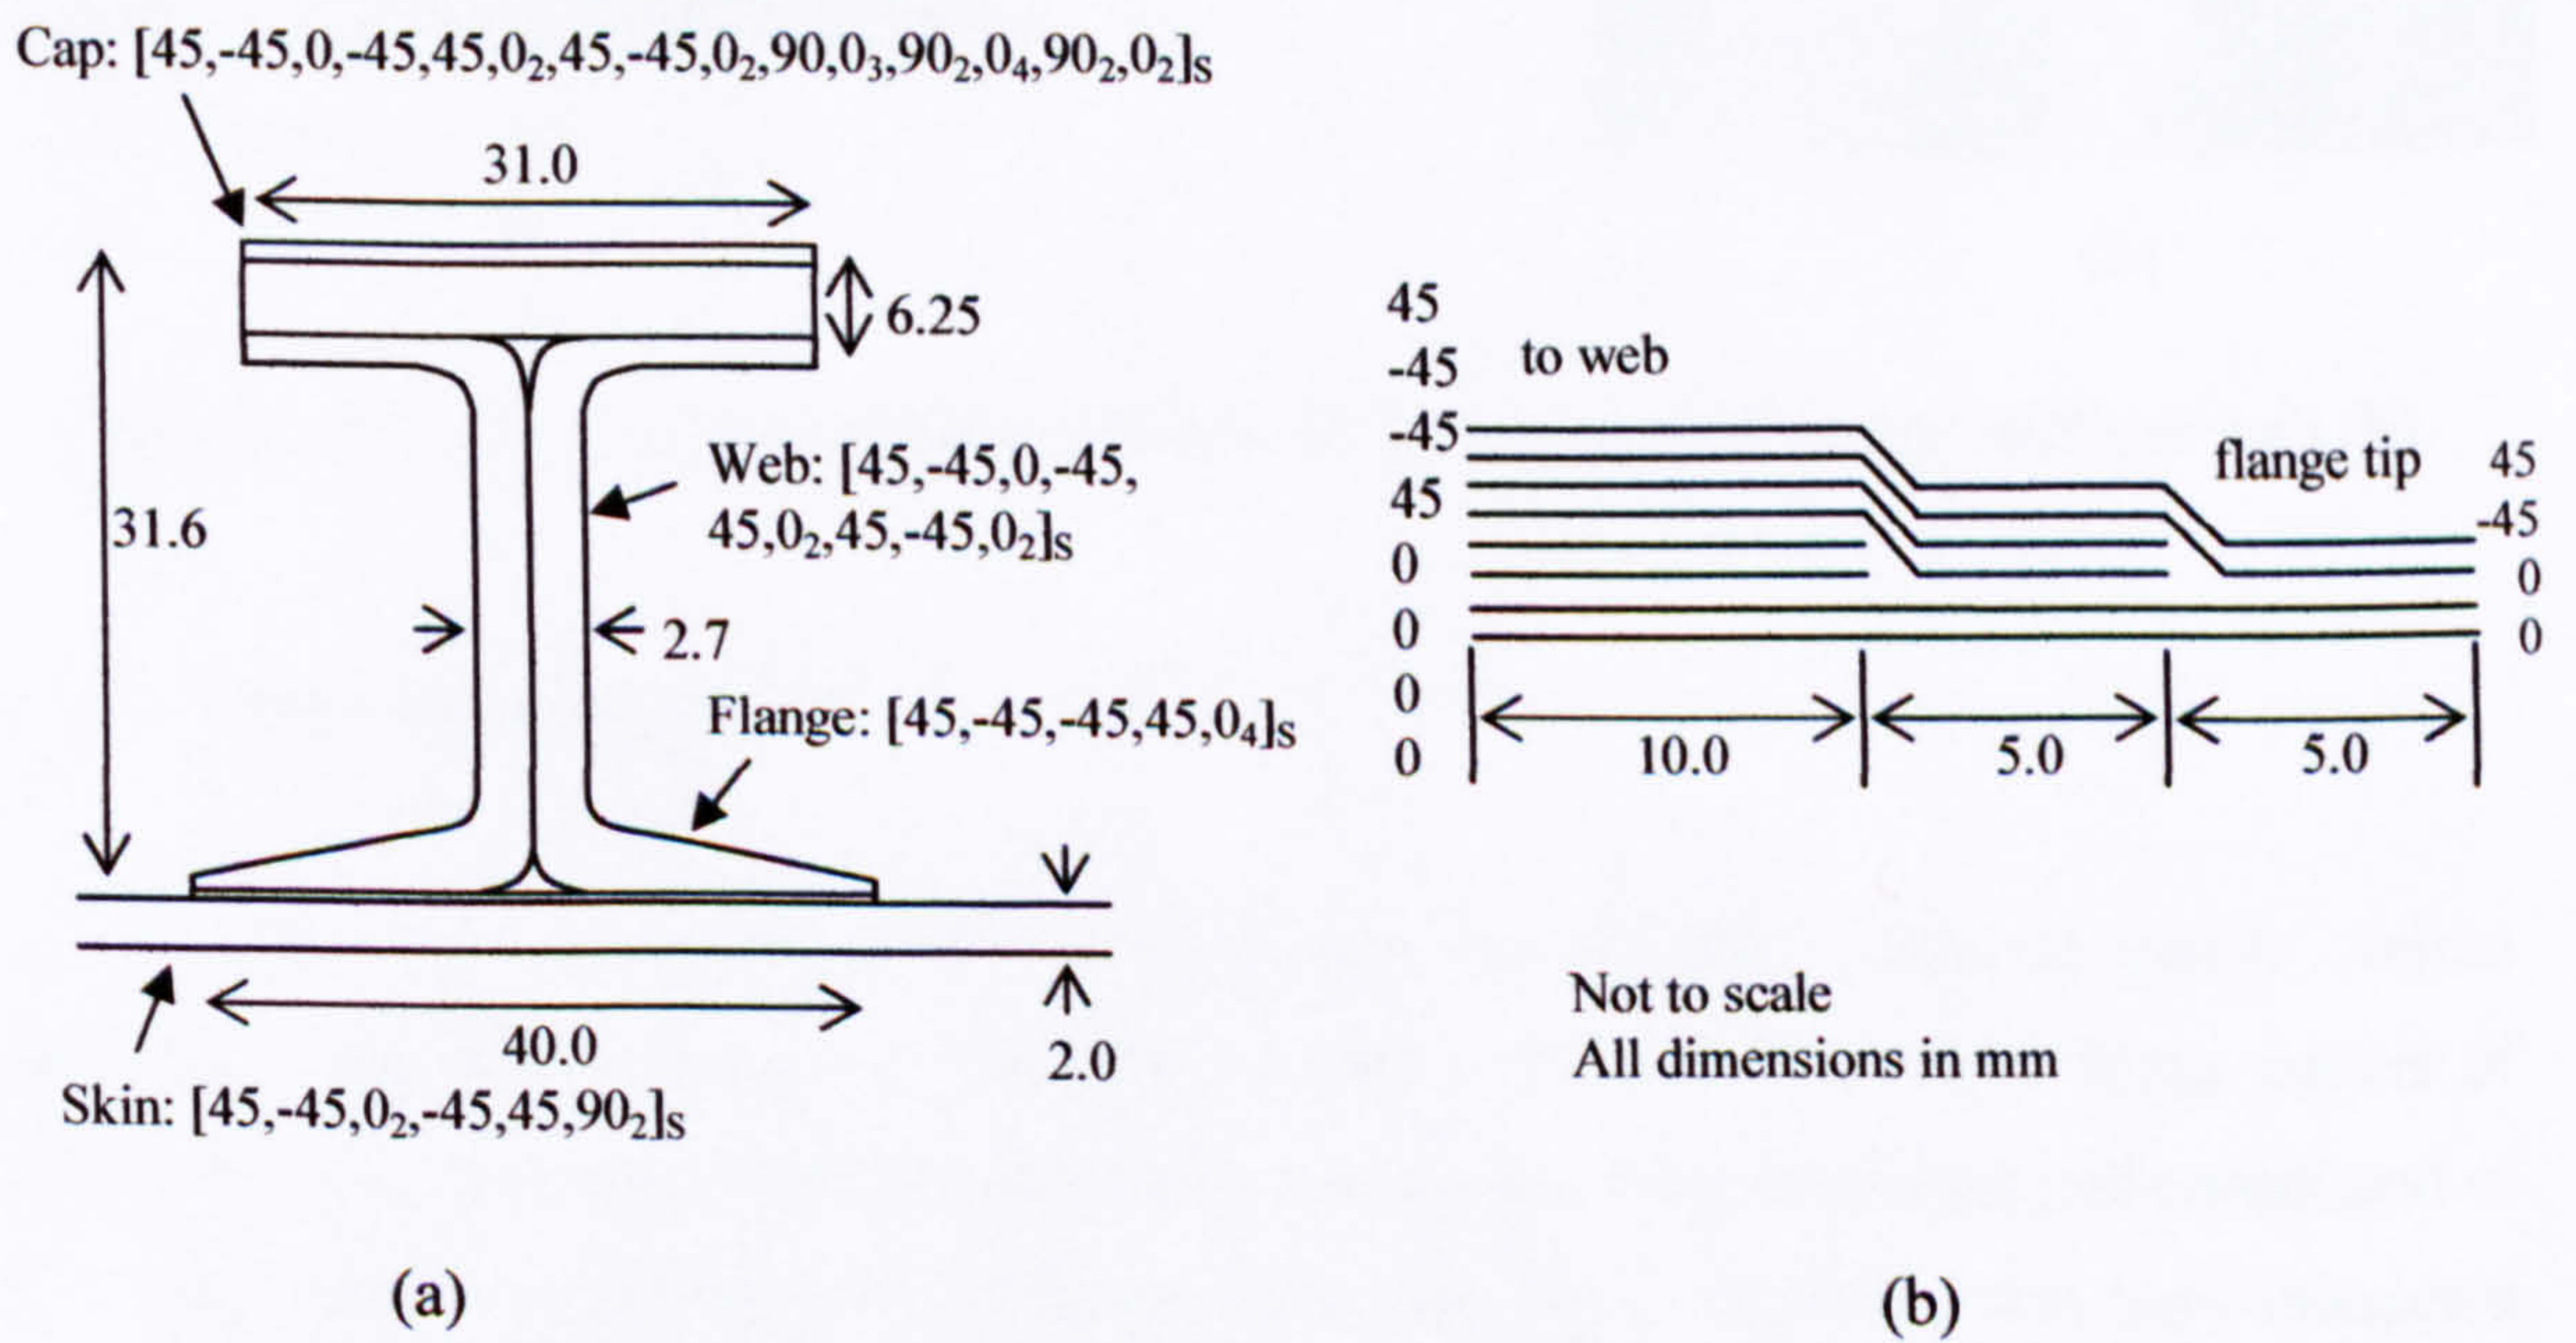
I-stiffeners: dimension and lay-up (a) with ply drop-off detail (b).
